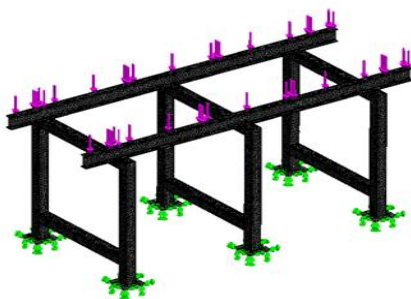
CAD Model divided in Small Pieces-2 (Elements)
